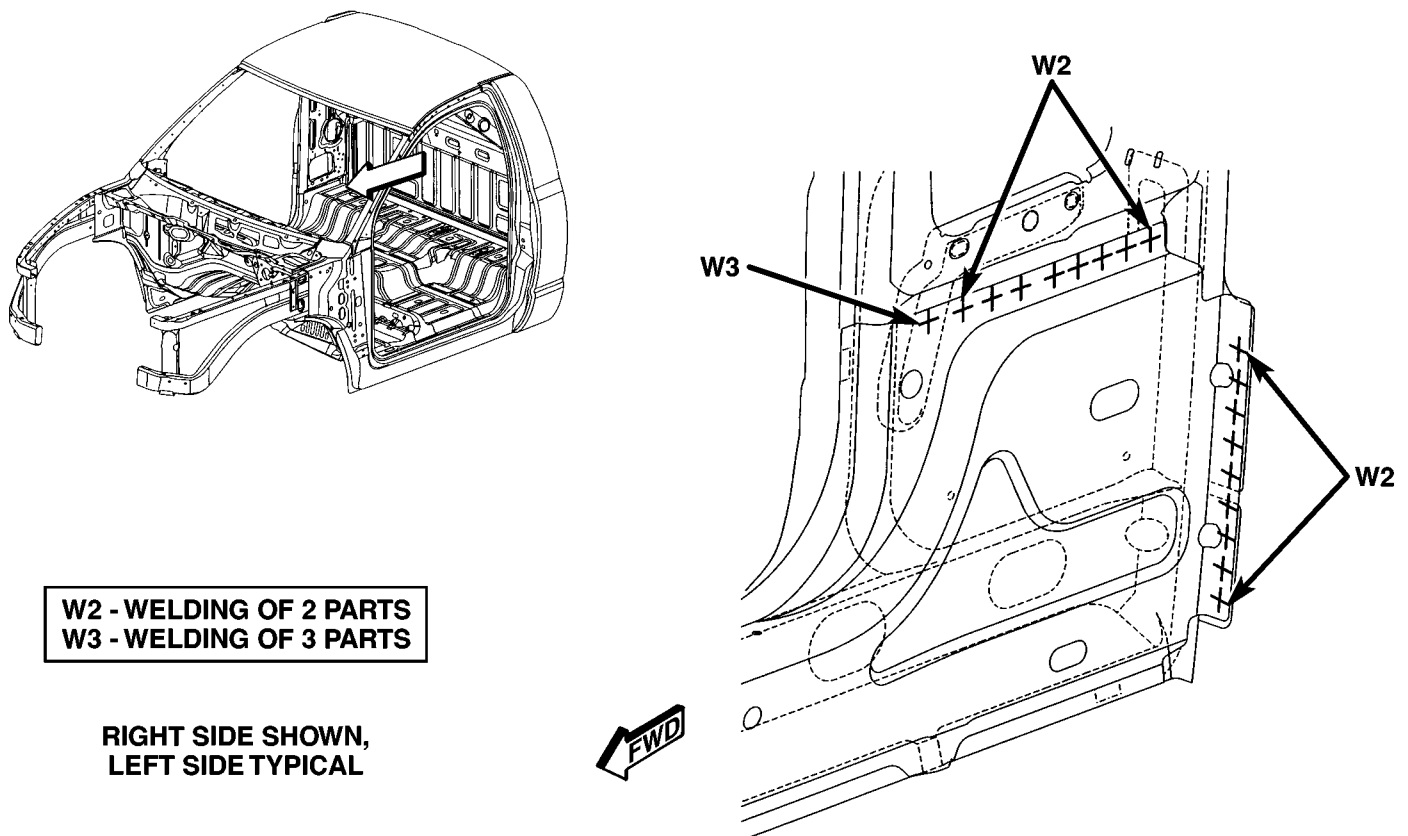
OUTER BODY SIDE APERTURE - QUAD CAB
